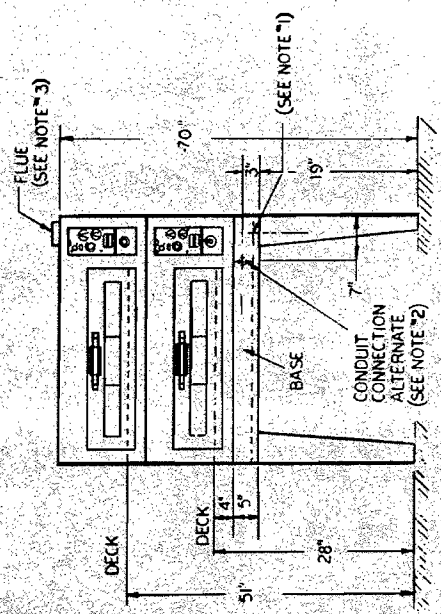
FLOOR PLANS CN51, 52, 53, CN71, 72, 73
